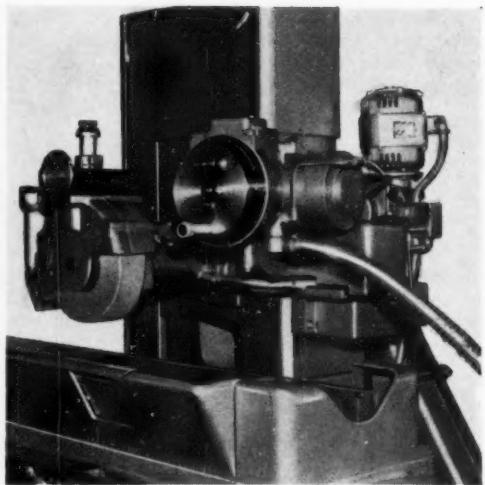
Close-up View of the Drive Arrangement for Power Feed and Rapid Return of the Wheel-head
